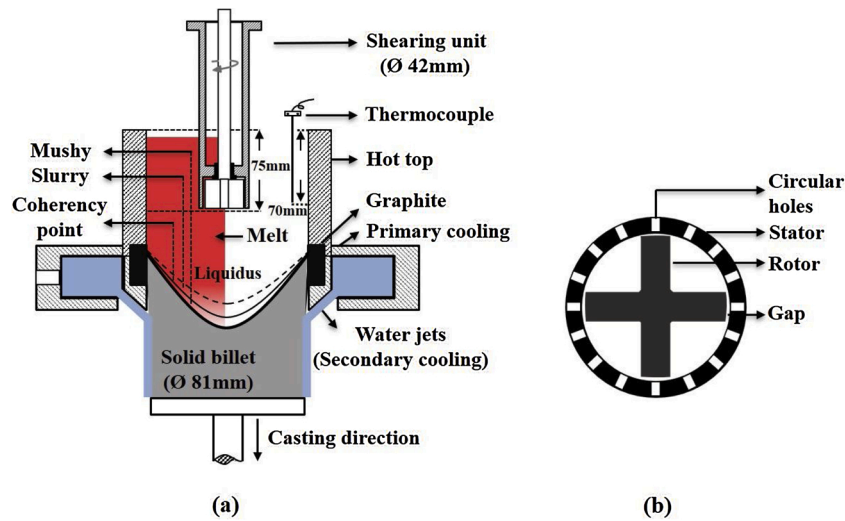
Schematic representation of (a) MC-DC casting process, and (b) bottom view of the shearing unit.
